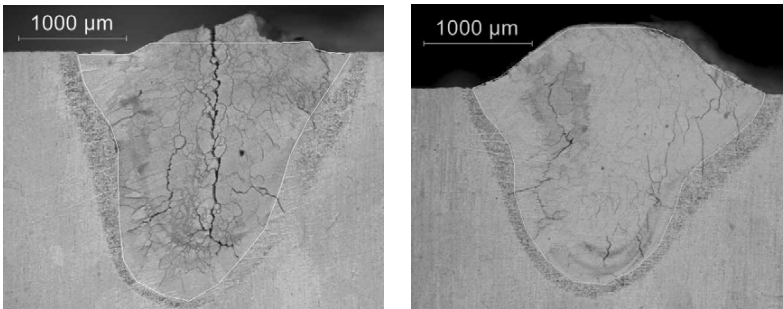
Cross-section macrograph for $v_w = 4 \text{ m min}^{-1}$; left: Nd:YAG laser welding; $P_{\text{Nd:YAG}} = 3 \text{ kW}$; right: BHLW; $P_{\text{BHLW}} = 3 \text{ kW} + 3 \text{ kW}$; chamber was filled with argon; bead on plate; EN AW-6060; angle $\phi = 6^\circ$
